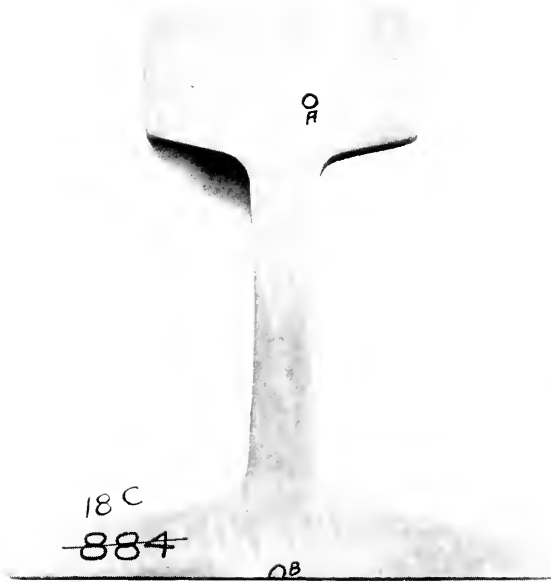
C. LIGHT ETCHING OF RAIL 18.
